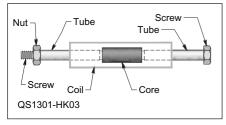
A long screw and a couple of pieces of tubing can help get that stuck core free from its coil.
